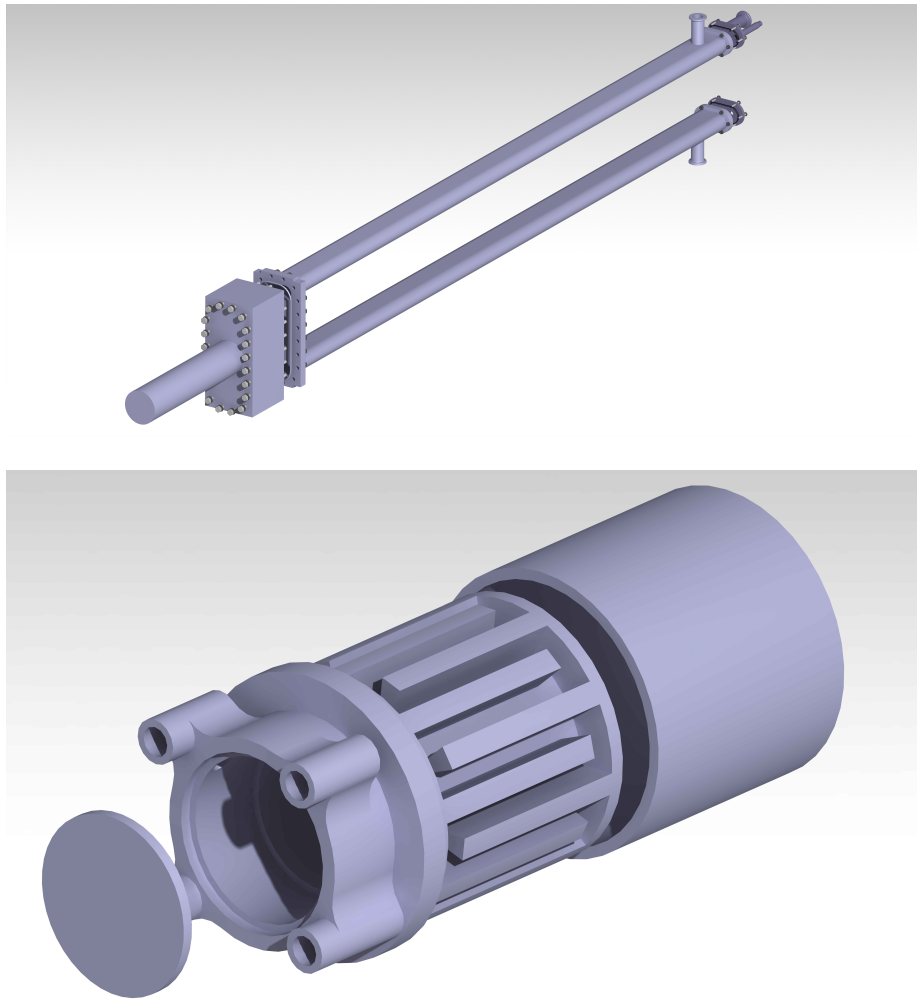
Exploded view of the vacuum recipient (top) and cold moderator vessel with lid and shell (bottom).
